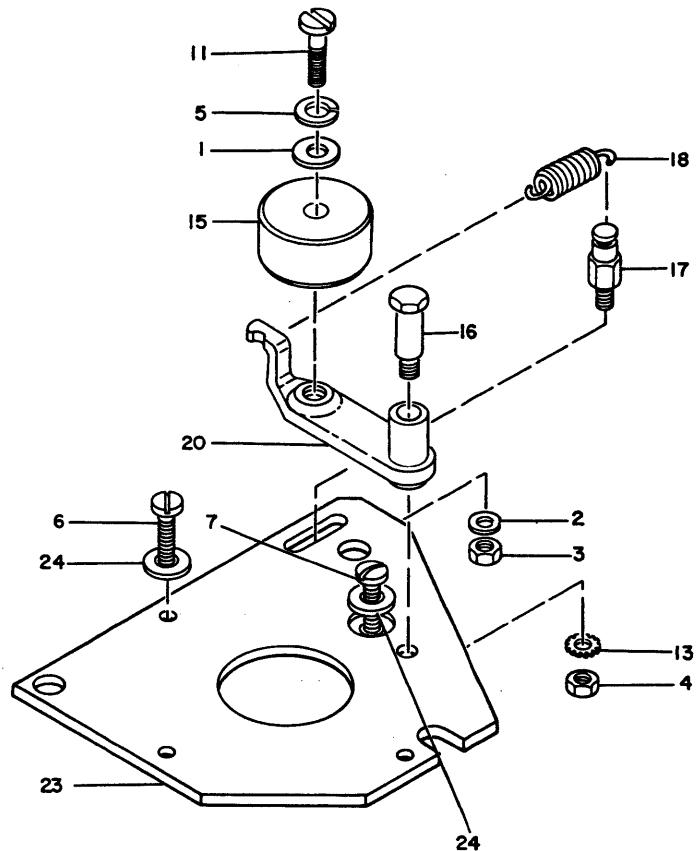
MOTOR DRIVE ASSEMBLY. SEE LIST 14.
